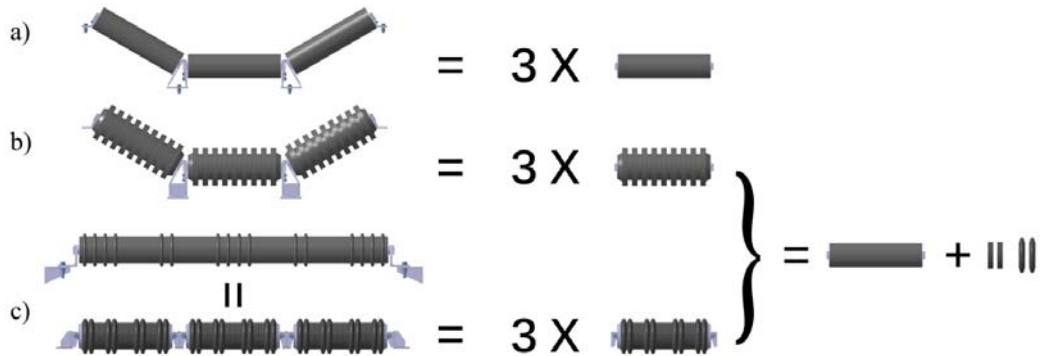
Simplified models of idler types: a) carrying idler, b) impact idler, c) return idler
